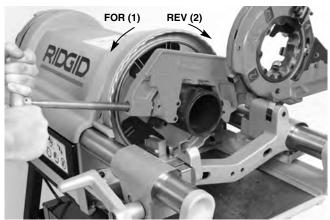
Cutting Pipe with 764 Cutter/Machine Rotation
